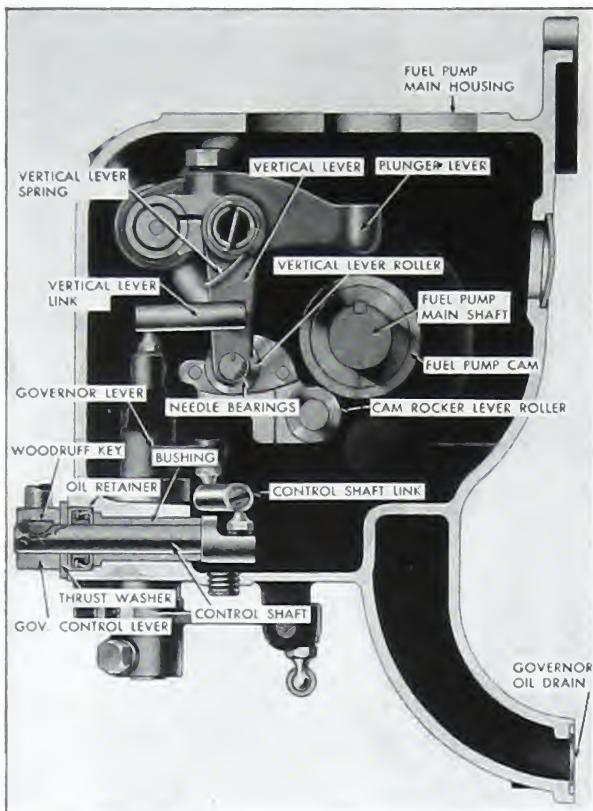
Cross section of hydraulic type fuel pump main housing
